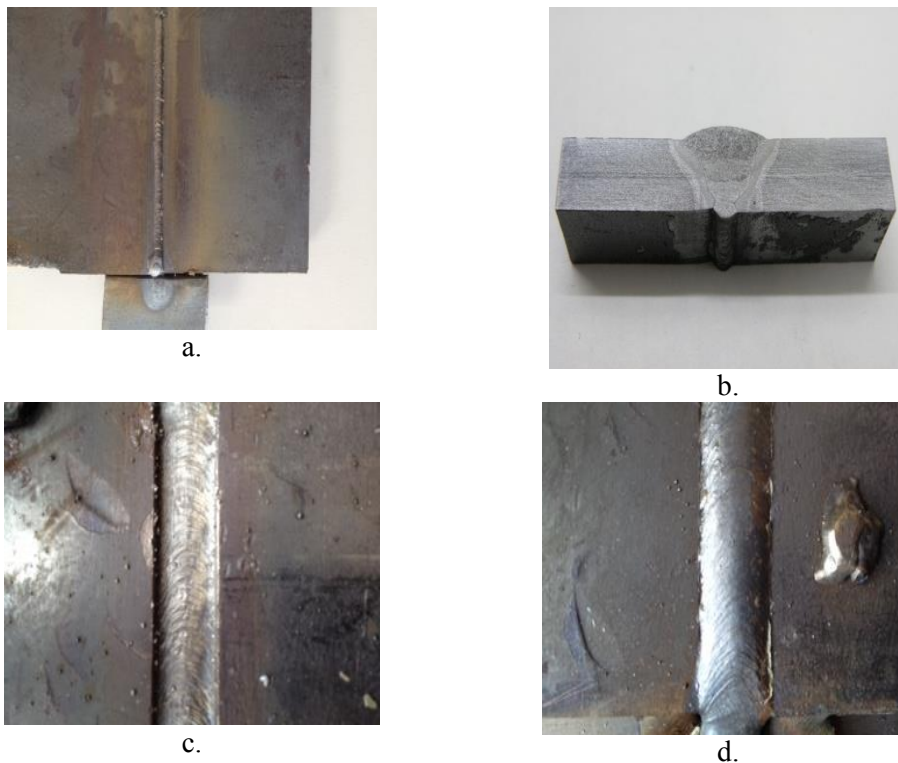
Weld appearance – a – root; b - macroscopic; c- second layer; d- exterior surface
